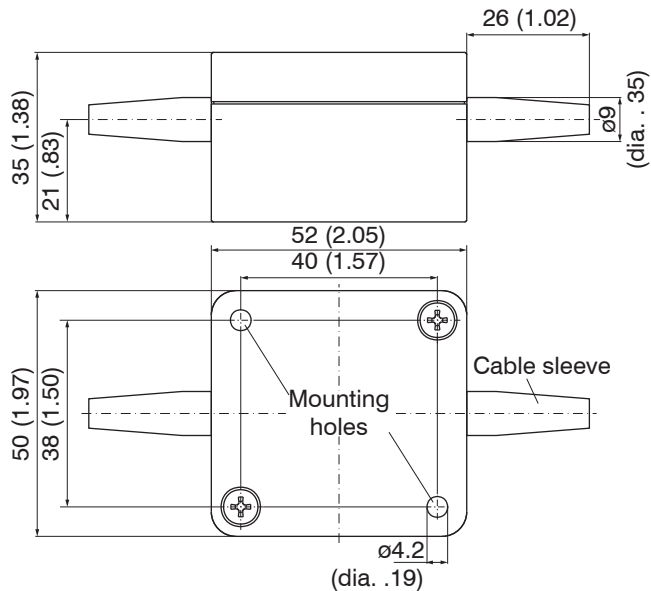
Dimensions of the controller, dimensions in mm (inches), not to scale
